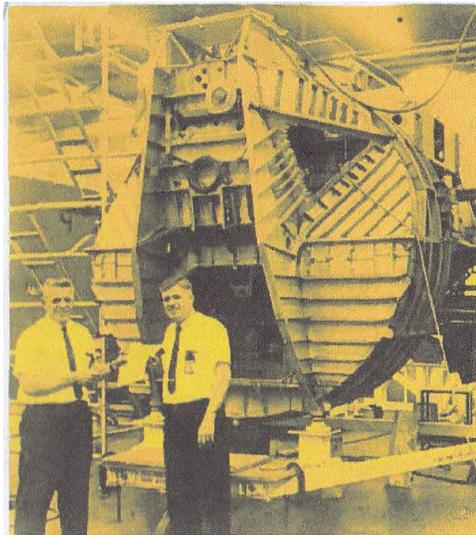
(left): LM Ascent Stage (front) welding [Sciaky at Work Vol. 9 no. 2].
